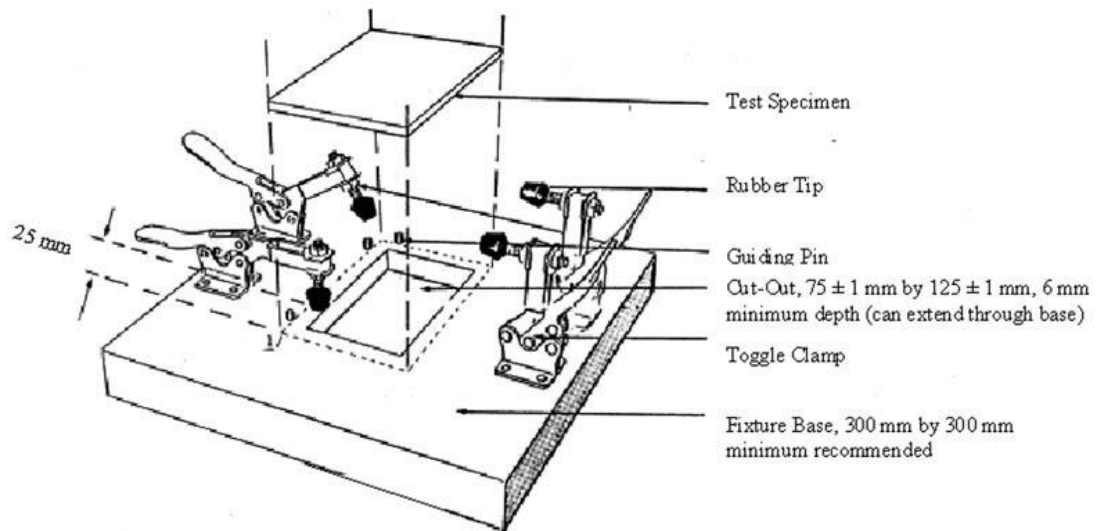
Impact support fixture (cited from Fig. 2 of ASTM [12])
